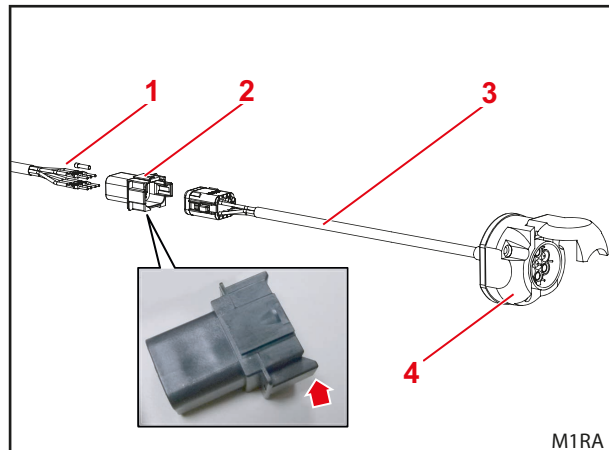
8-pin plug connector with "lug" to connect an adapter cable with a 7-pin socket
